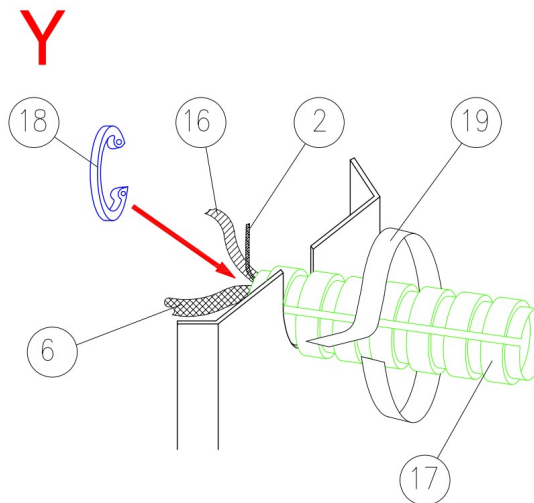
Detail Y from Fig. 2, 3, 4 and 5: Fastening the protective sleeve to the cover strip
